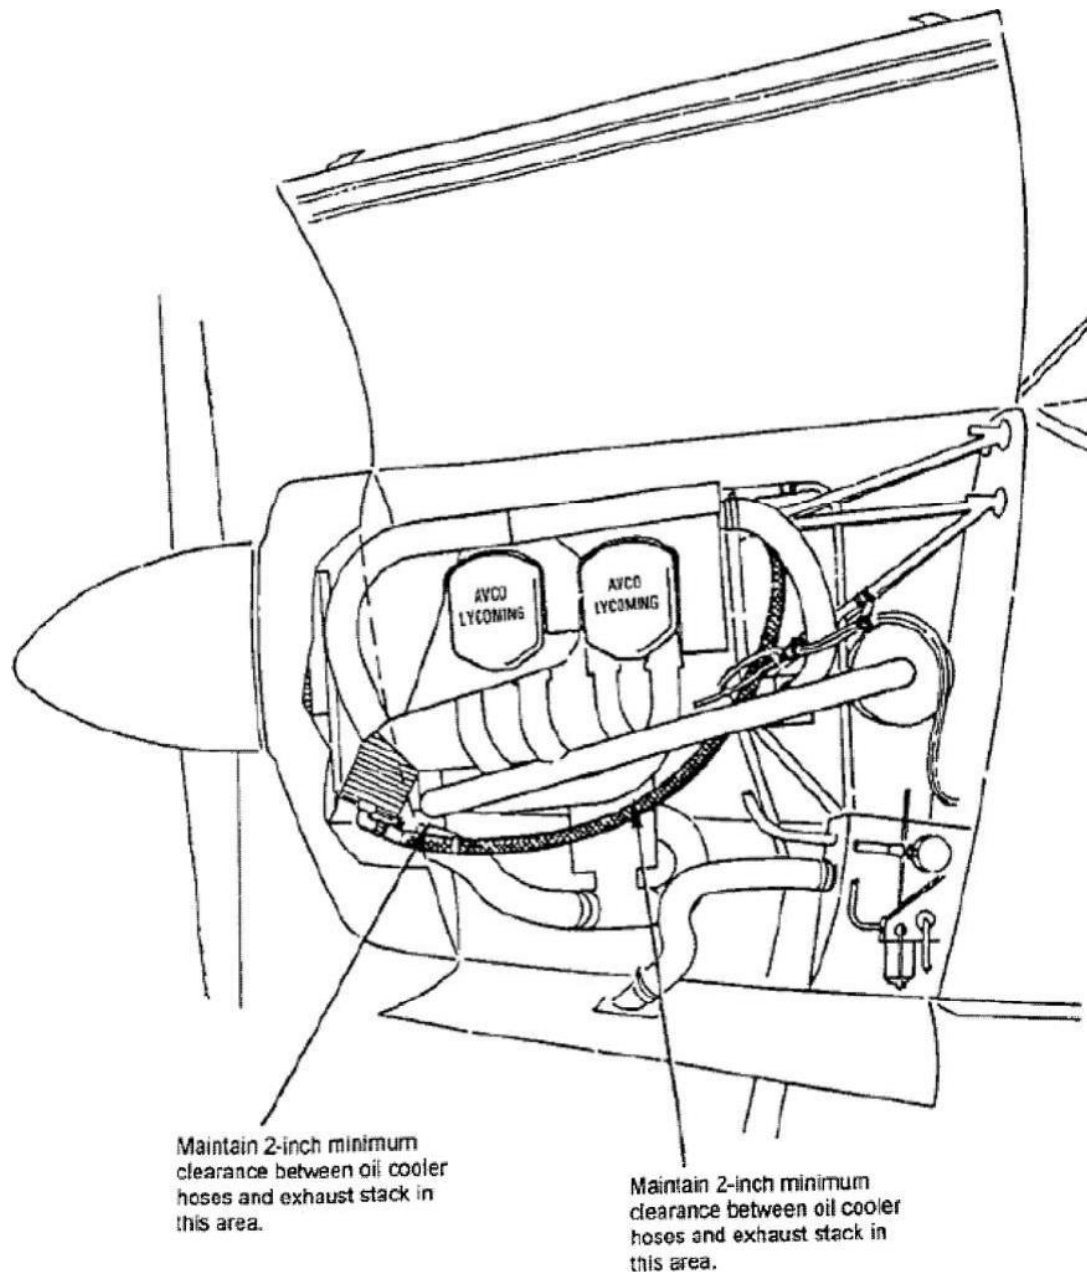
to paragraph (h)(2) of this AD: Acceptable clearances
